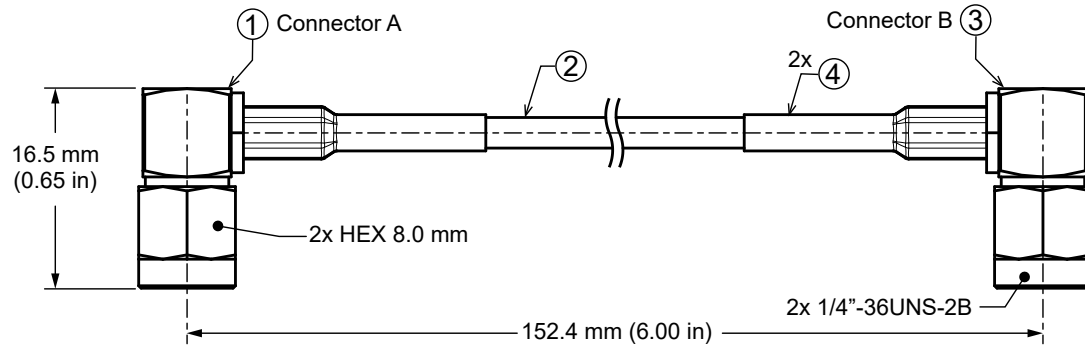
Product Dimensions for the CSE-SGMR-152-SGMR Cable Assembly
